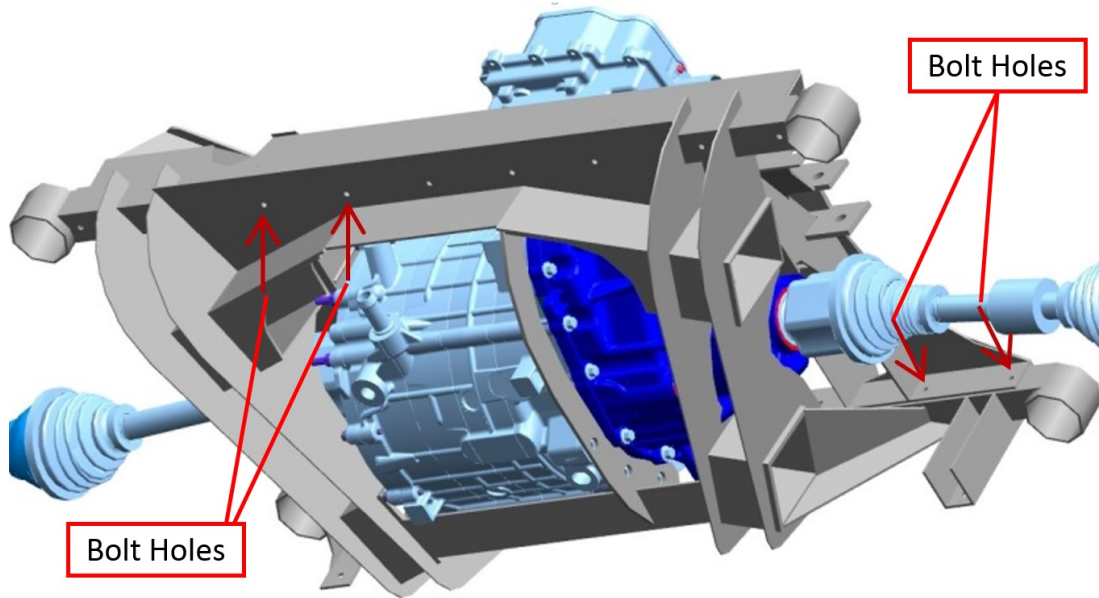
Underside view of assembly emphasizing bolt holes to attach two halves together.
